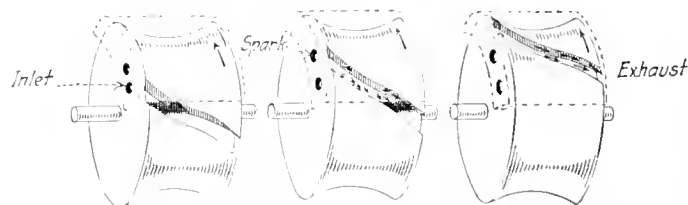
THREE POSITIONS OF THE PISTON TOOTH AND CYLINDER GROOVE IN THE SANDERS TURBINE RELATIVE TO PORTS IN THE SHROUD AT THE MOMENTS OF GAS ADMISSION, FIRING AND EXHAUST
